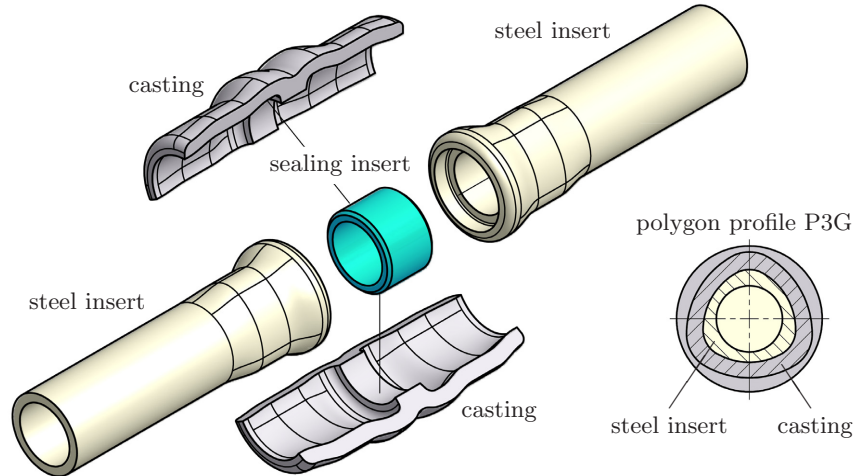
Exploded view of the demo prototype; only two-thirds of the casting are shown. The casting gate is not shown.
